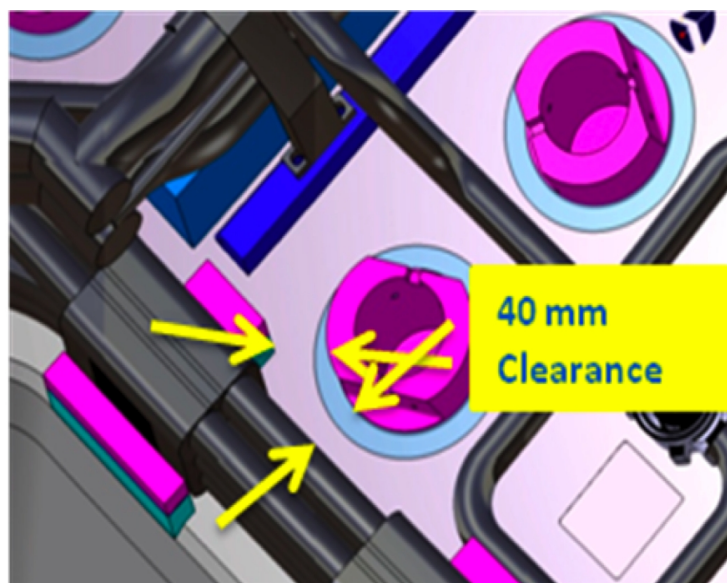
Clearance Between IVCs and Blanket Shield Module Keys
